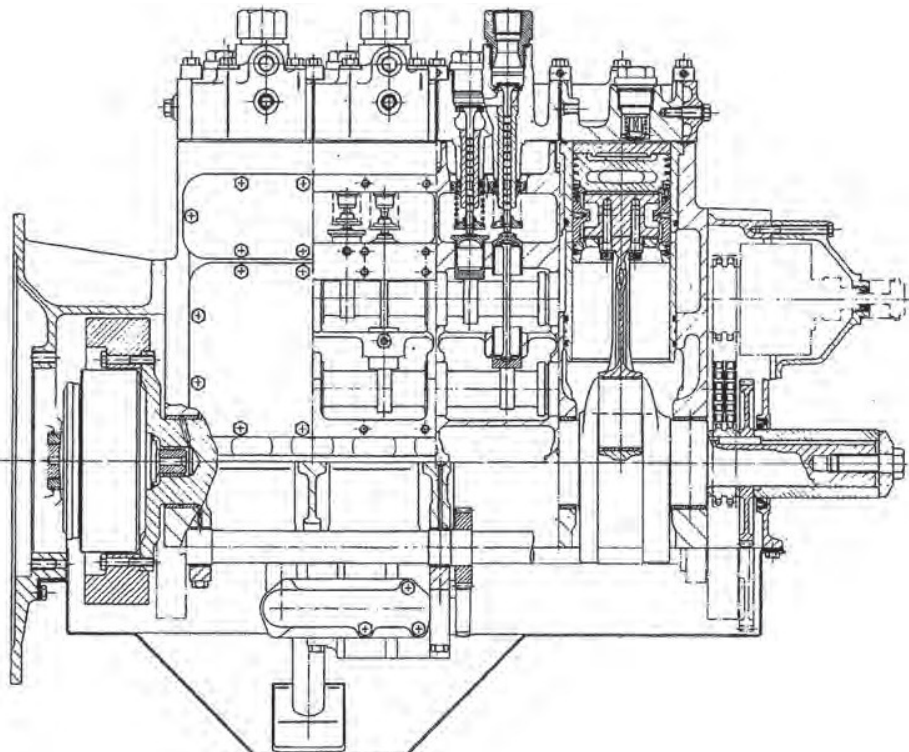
The L-4 prototype expander in longitudinal cross section. The step-up gear assembly, shown in the flywheel on this picture, was eliminated in the final version.
